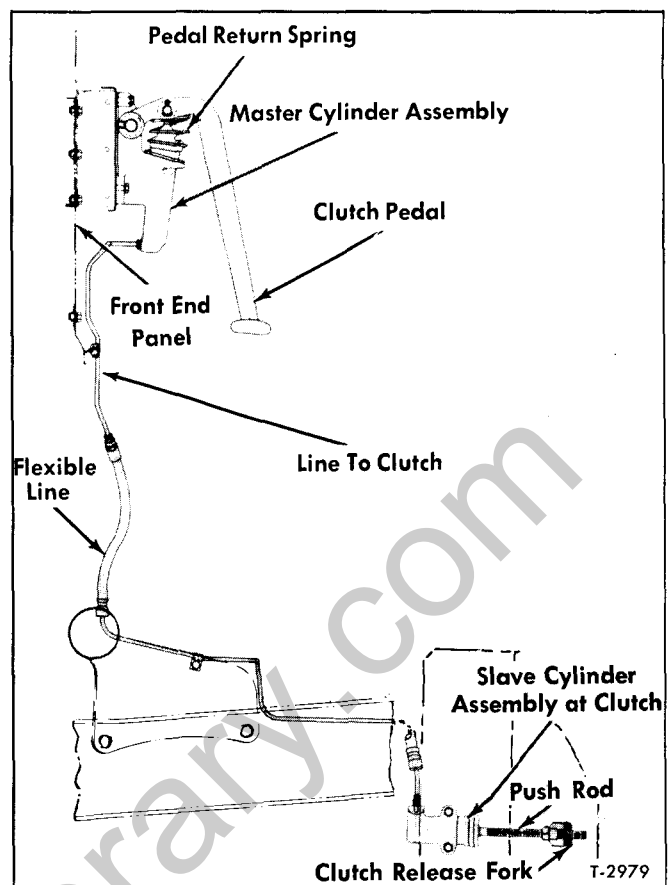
Clutch Hydraulic System (Steel Tilt Cab Models Except TM 80 and TV 70)
